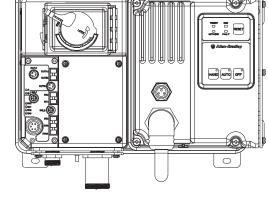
Dimensions for NEMA Type 4X with Conduit Entrance
